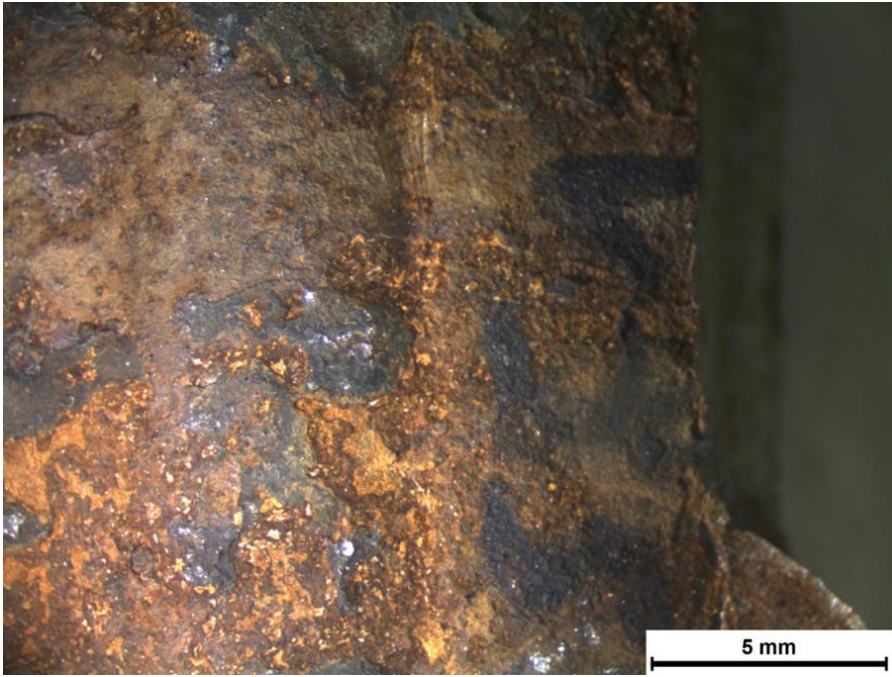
Corroded fracture surface of S355J2+N material
